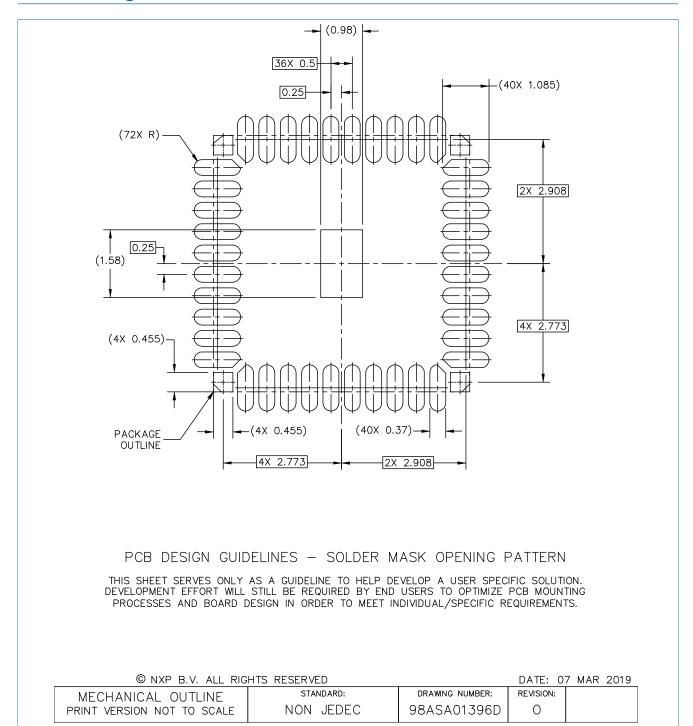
Reflow soldering footprint part1 for HVQFN40 (SOT618-16(SC)
